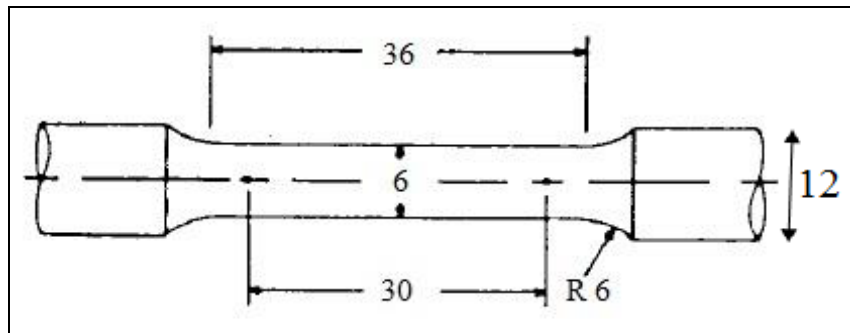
Schematic diagram of tensile specimen (All dimensions in mm)
